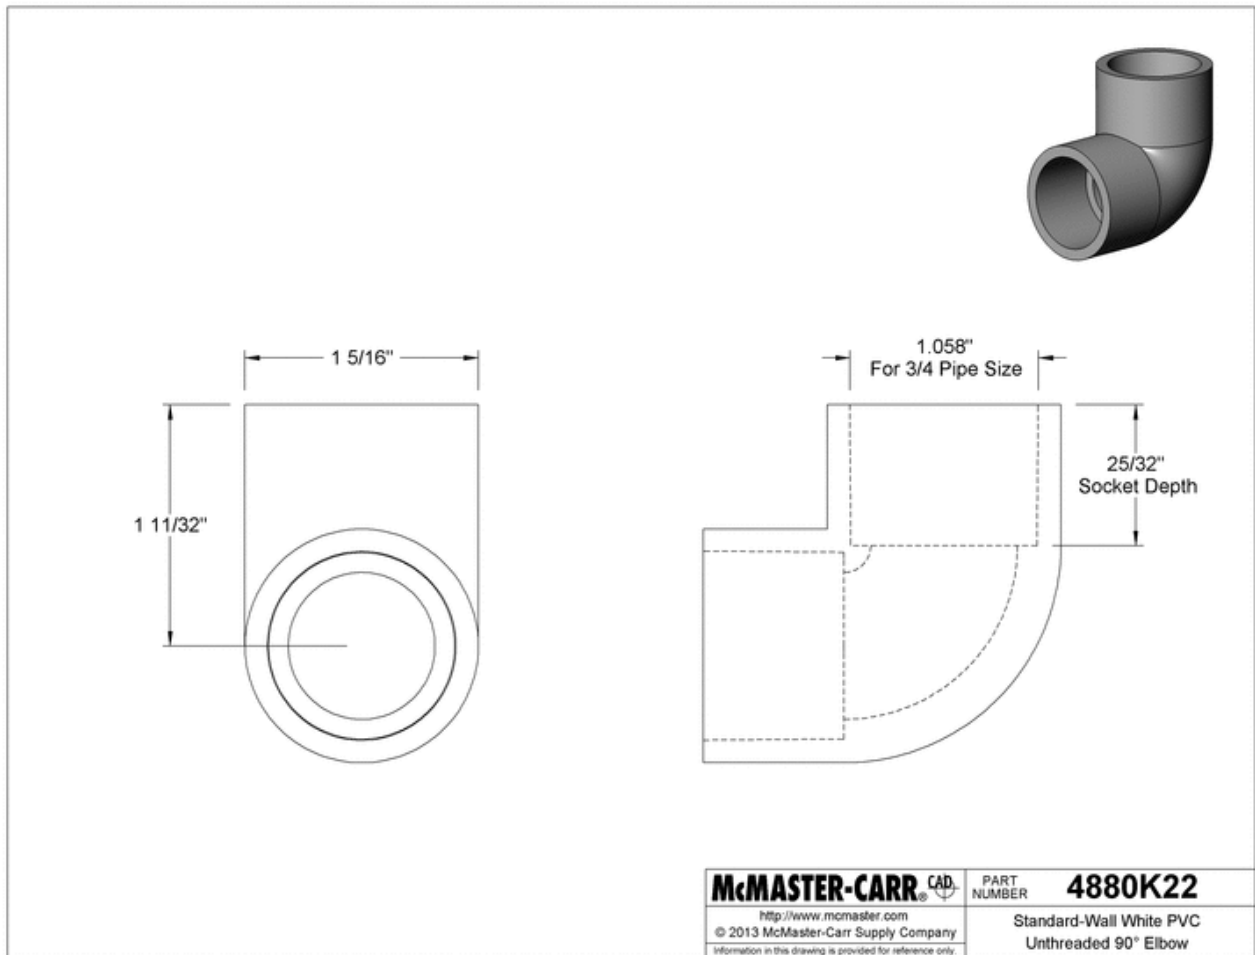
3/4 Inch PVC Elbow Connector Engineering Drawing [28]
